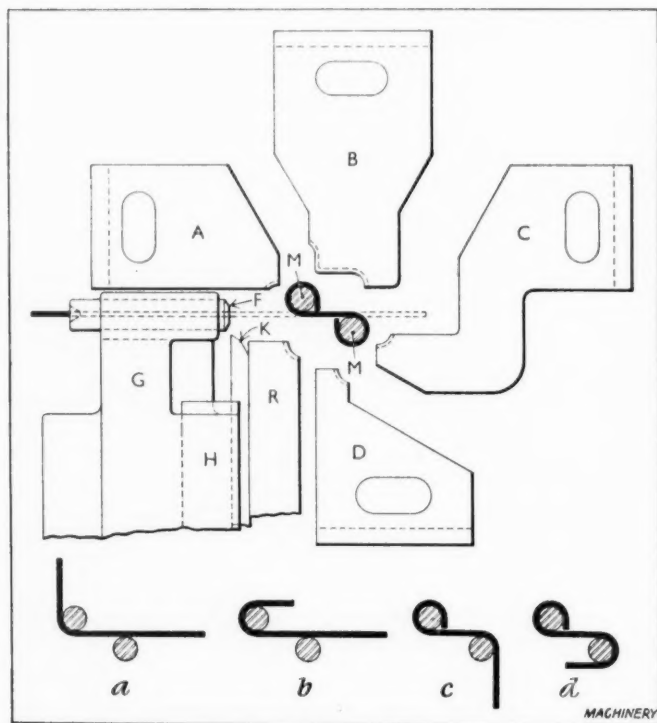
Set-up for Forming S-Shaped Hook *X*, Fig. 1, on a Four-slide Wire-forming Machine
